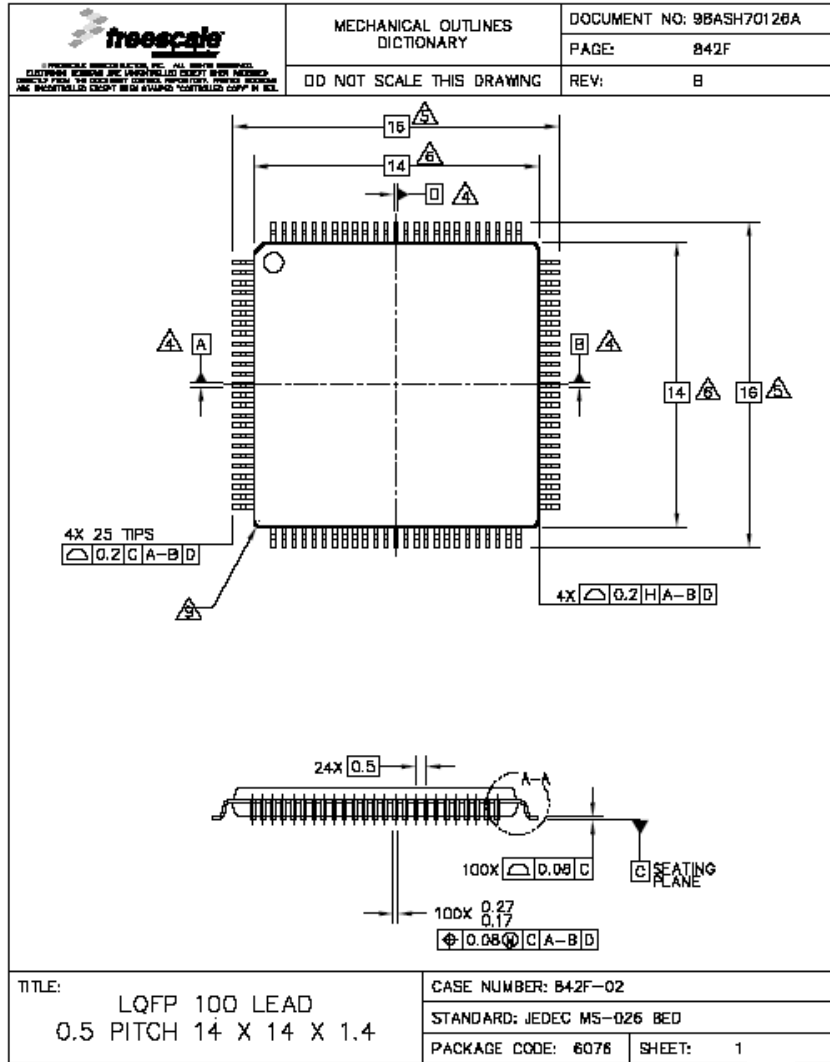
100 LQFP package mechanical drawing (1 of 4)
